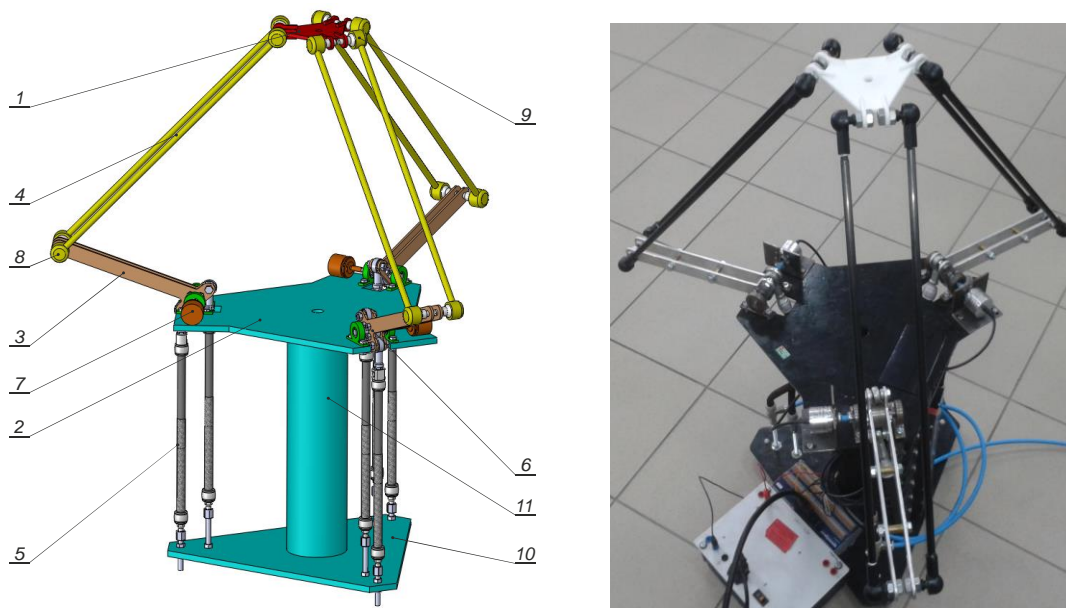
Solid model of parallel delta type manipulator: 1 - working platform, 2 - upper platform, 3 - active arms, 4 - passive arms, 5 - muscles drive, 6 - revolution joints, 7 - angular position sensors, 8, 9 - ball joints, 10 - base, 11 - support column.
